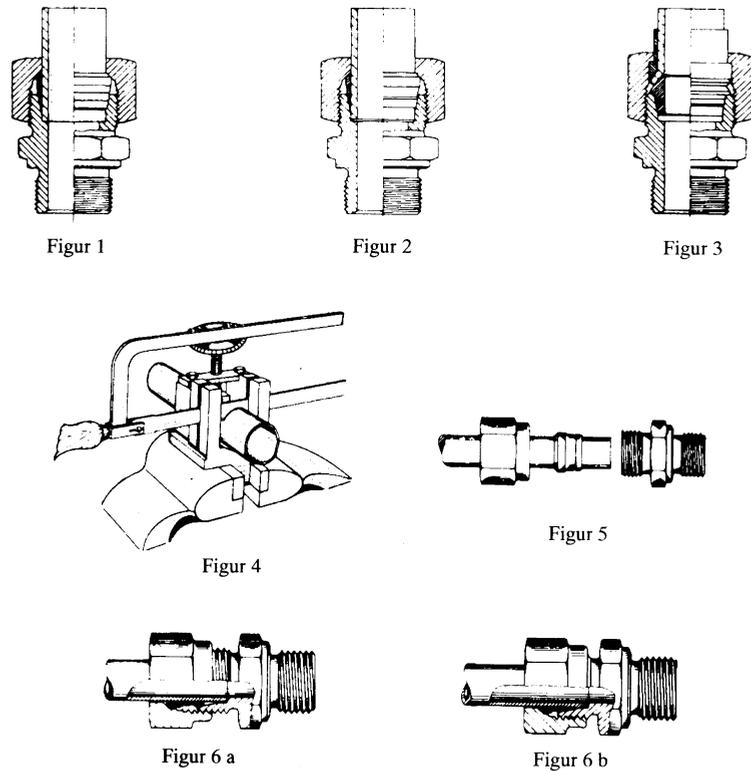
shows a cutting ring coupling cross section with all parts. Note the direction the cutting ring faces. The assembly procedure is as follows:
